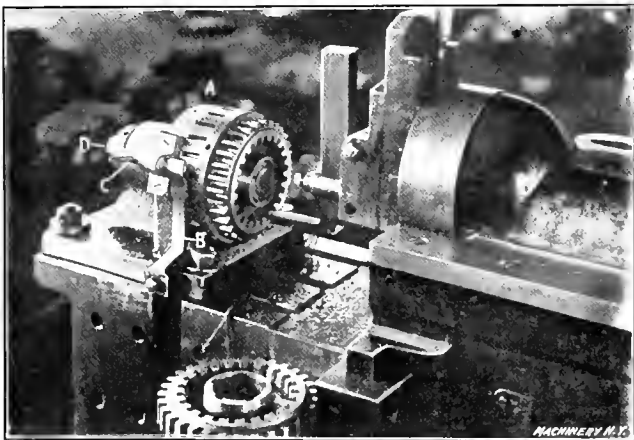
Cutting Inside Clutch Teeth on a Shaper
